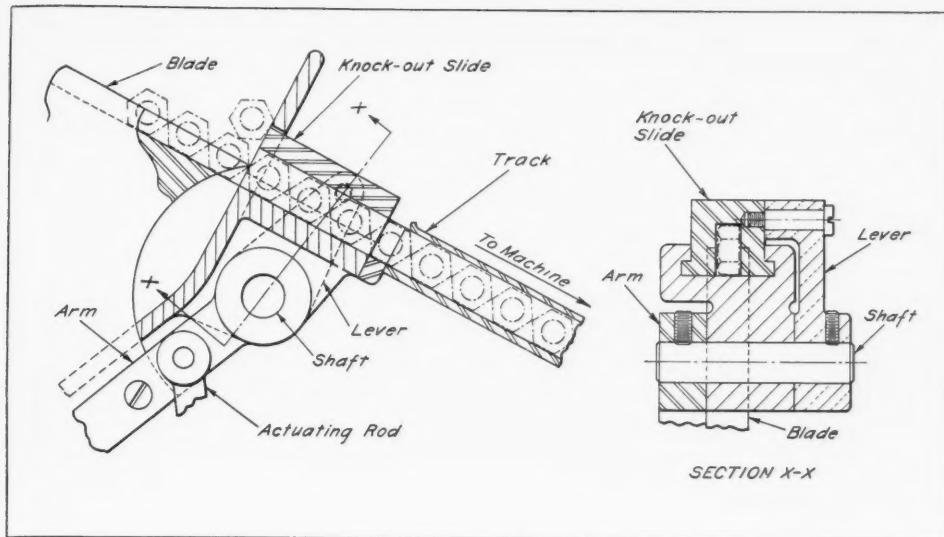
Enlarged sectional view through the knock-out mechanism of hopper seen in Fig. 1. Oscillation of the knock-out slide clears the track mouth of improperly positioned parts
